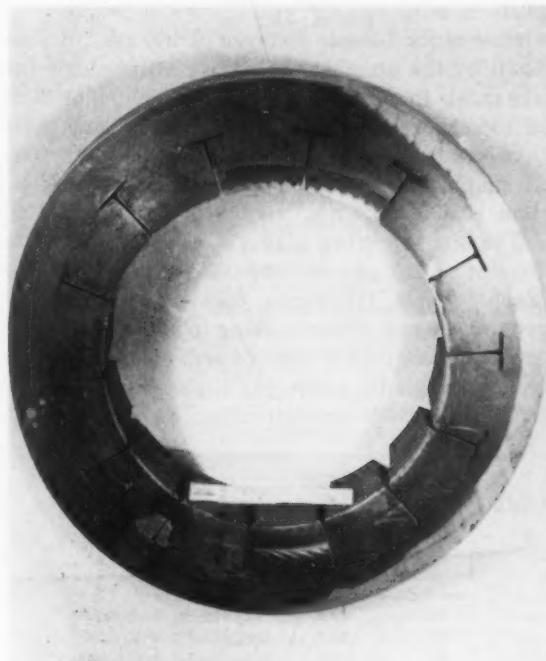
The extrusion die used to produce the section on the right in Fig. 1.
